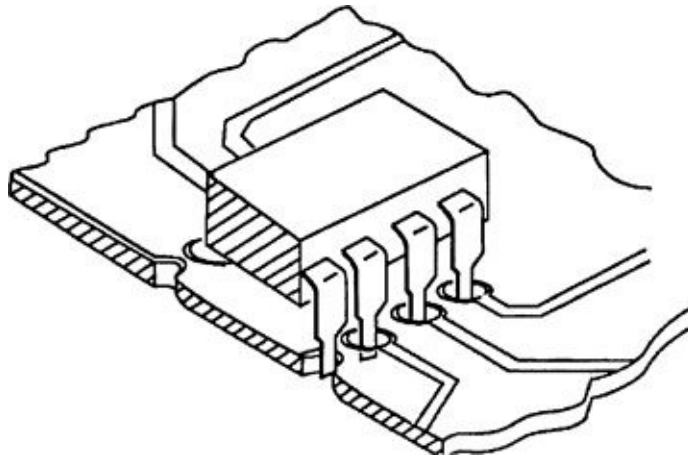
Dual in-line package (DIP) through-hole assembly.
